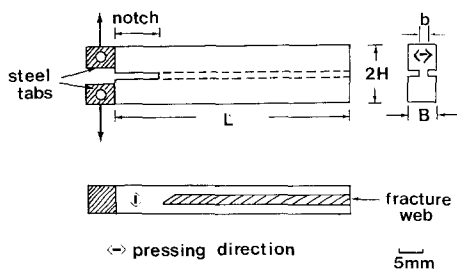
Machining details for DCB fracture samples showing specimen size and notch configuration.
